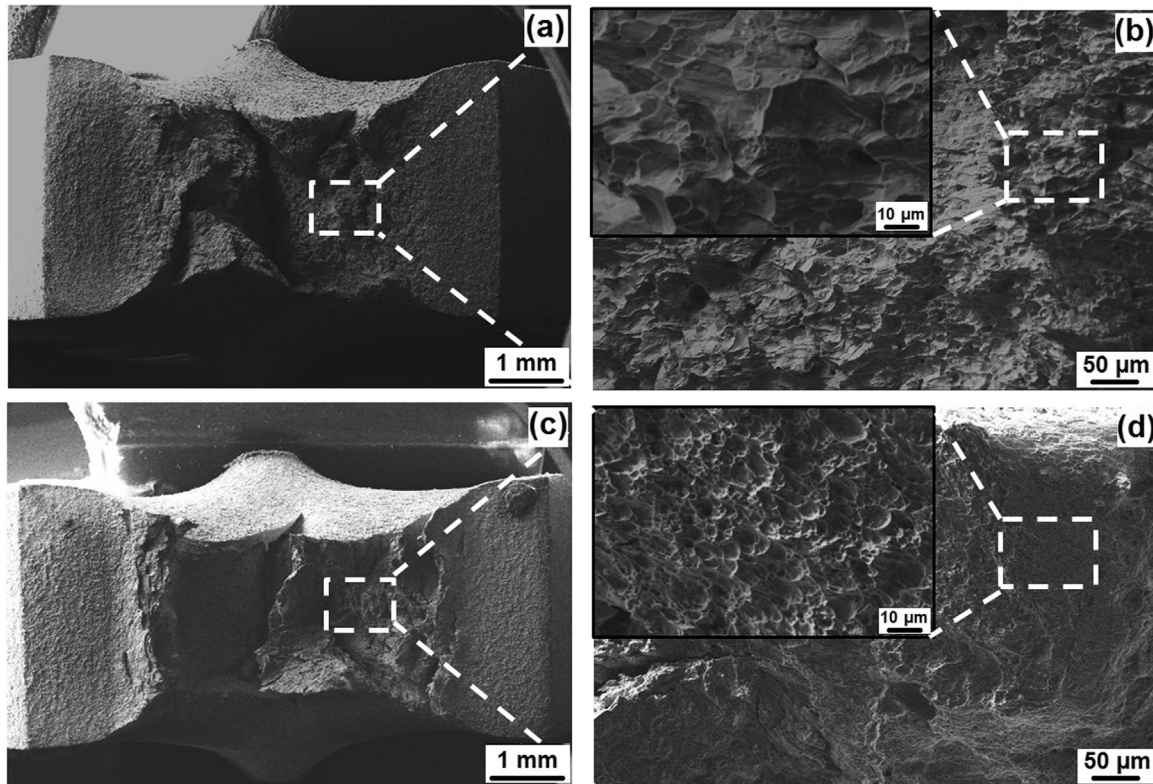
SEM fractographs showing the fracture surfaces of the samples after impacting at room temperature: (a)–(b) CG sample and (c)–(d) FSPed FG sample.
